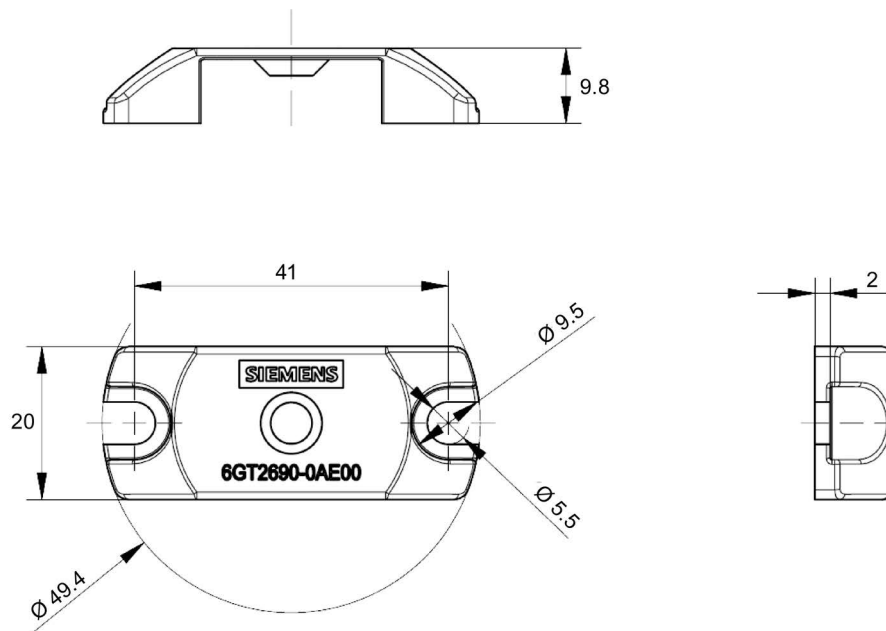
Dimension drawing of fixing hood 6GT2690-0AE00
